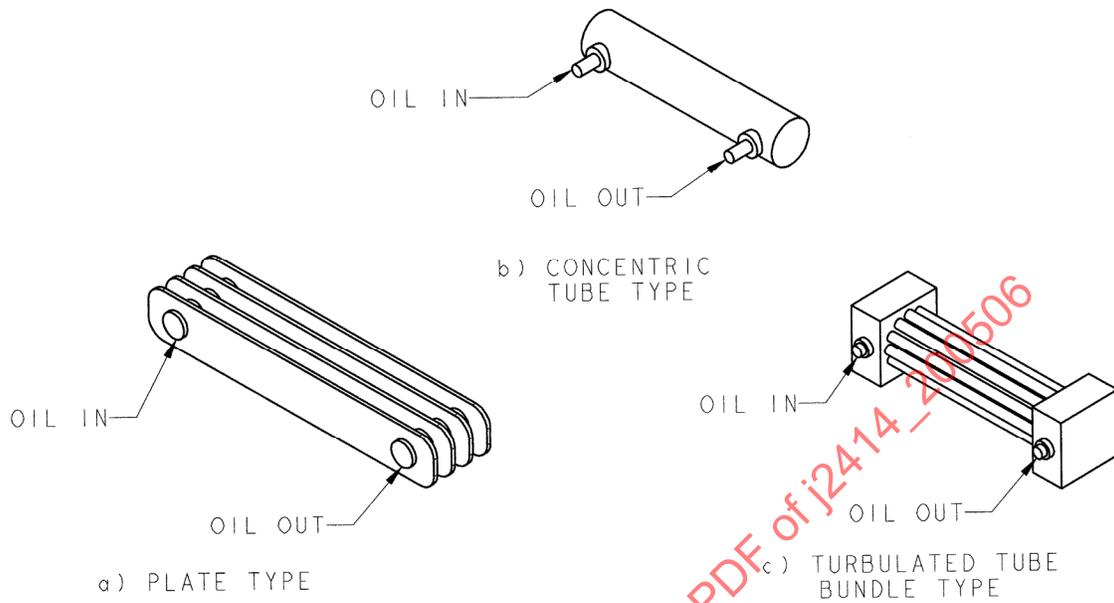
OIL COOLERS FOR MOUNTING IN RADIATOR OUTLET OR BOTTOM TANKS
